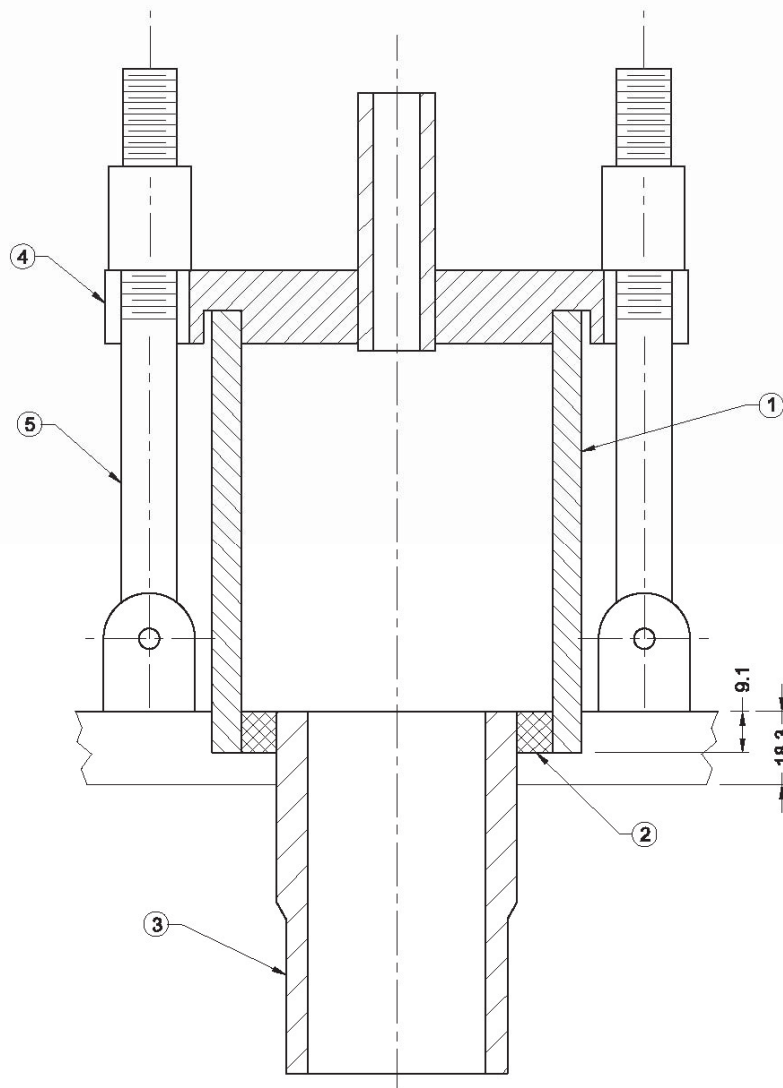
Details of the Split Ring Collar for the Drilling Stop Gauge
